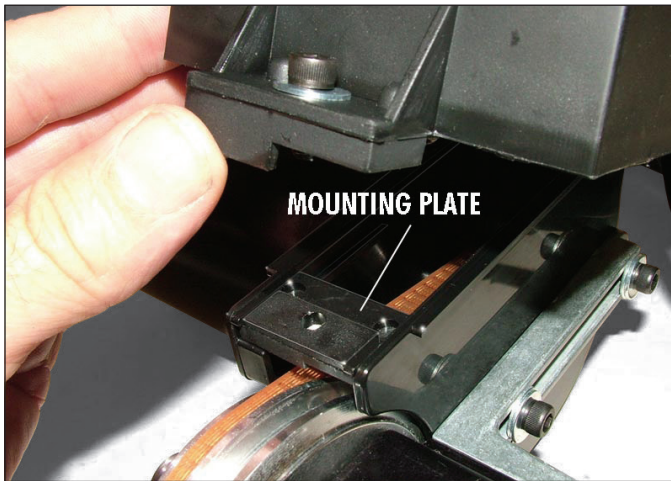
Insert mounting plate between belt guard halves and secure speed control housing to nut in plate.
